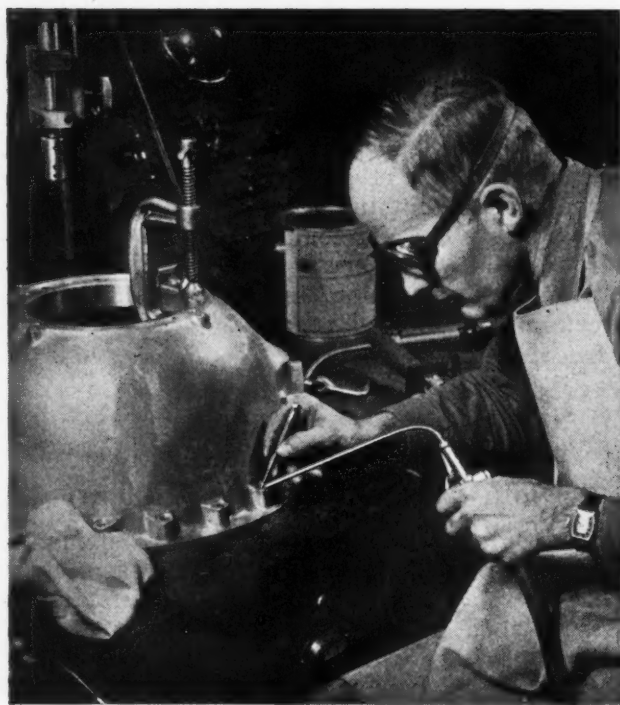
Preparing an Engine Part for the Extraction of a Broken Drill
